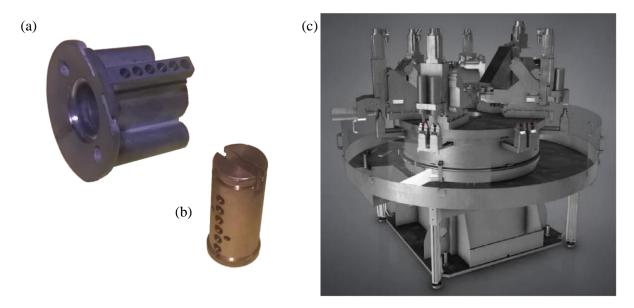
(a) lock cylinder; (b) plug; (c) rendered CAD model of the machine tool
